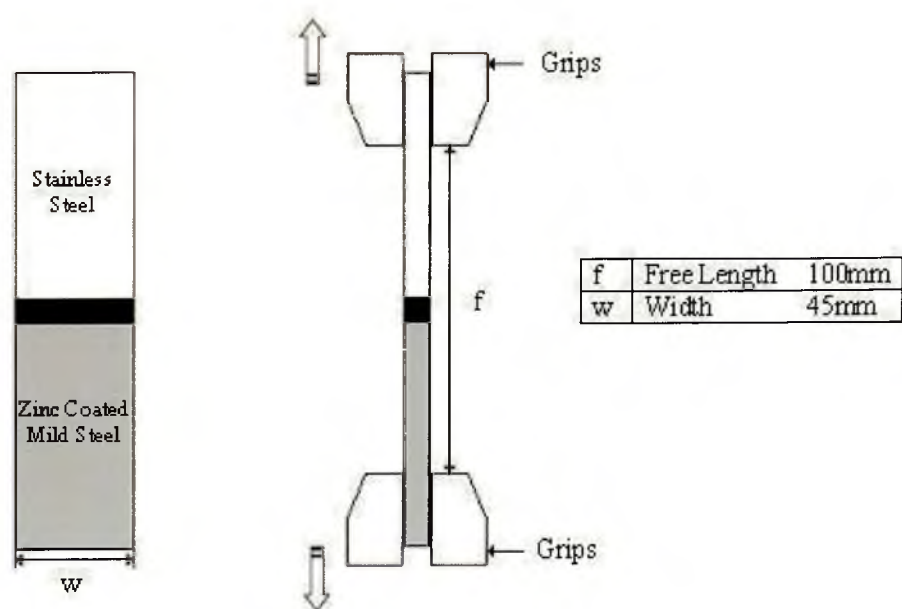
Schematic diagram showing dimensions and setup for similar thickness fatigue test
